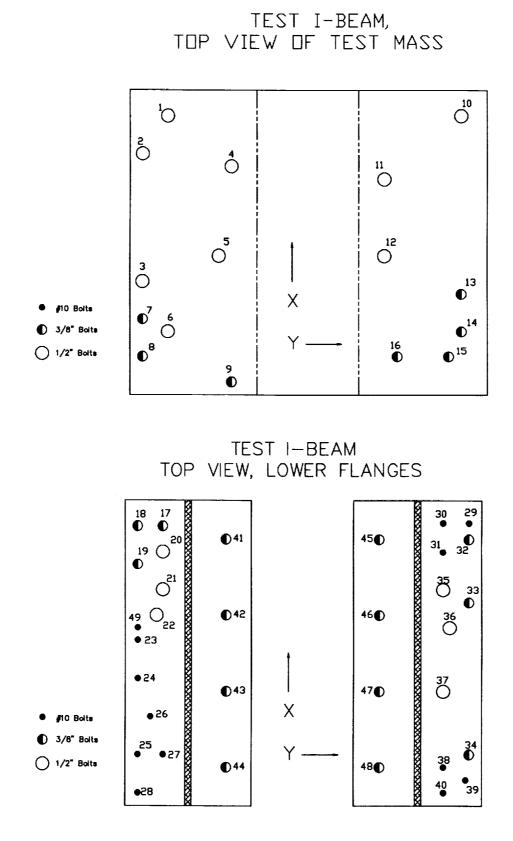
Test Fixture, Wire Pattern, Full Torque Test
